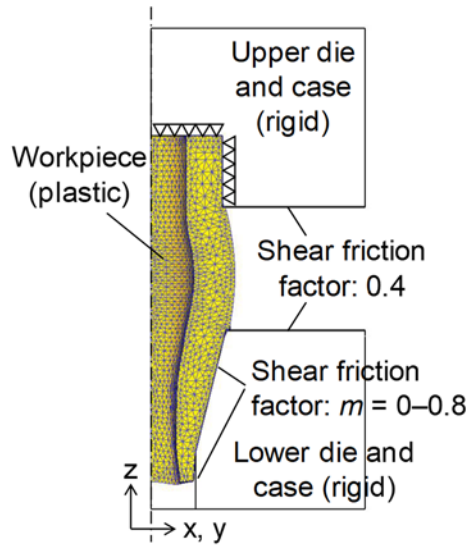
Cross-sectional view of finite element analysis model for forging (forming stroke in 2nd stage of forging:  $s_2 = 0$  mm).
